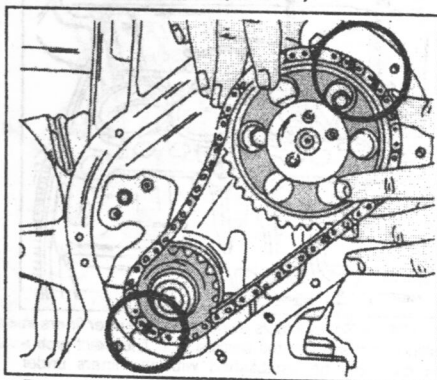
When fitting the timing chain make sure that the timing chain marks and the timing sprocket marks are aligned as shown.
